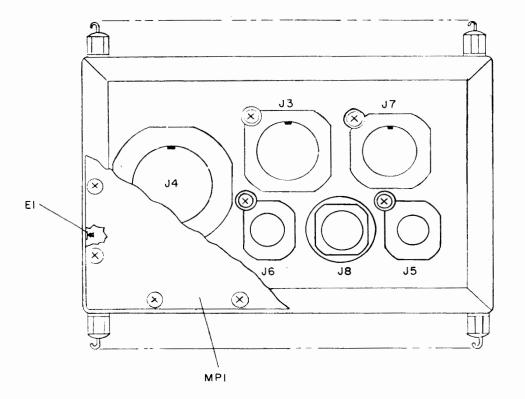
Switch Interlock Assembly A1MP7, Component Locations
